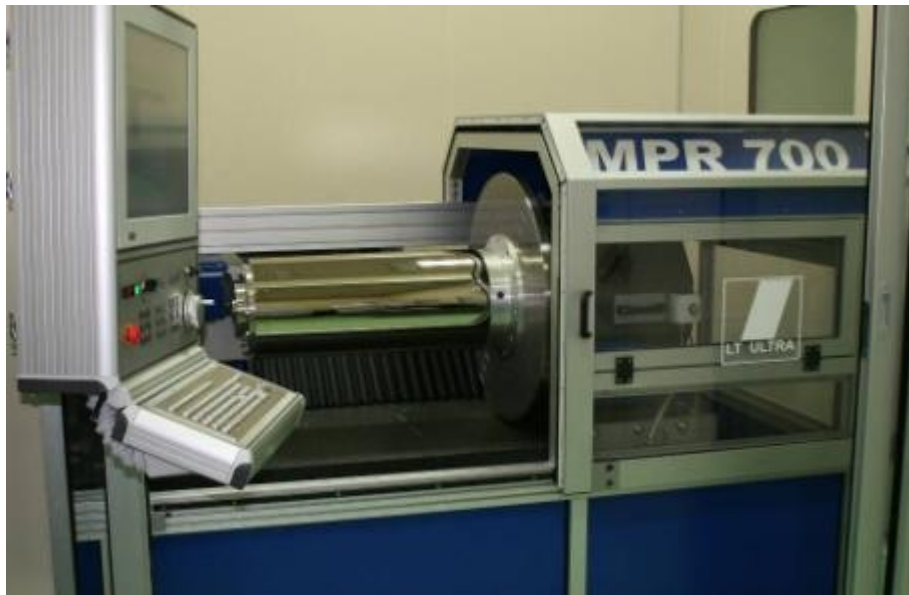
Picture of the 600 mm long master assembled on the MPR.
